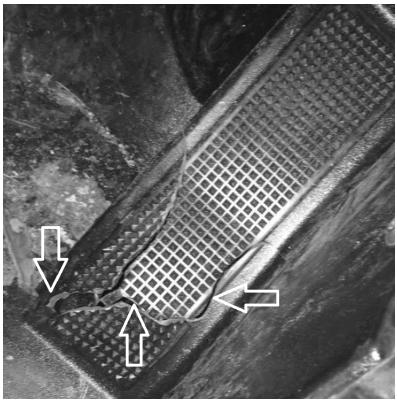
Debris Penetration Through Passenger Footrest (IDI 36); Smooth, Clean Break Lines and Edges Indicate Brittle Failure
